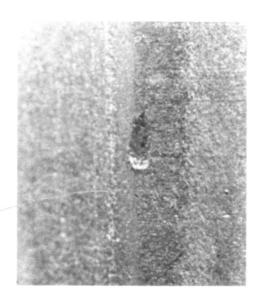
Surface of Welded Bomblet Body in Figure A26
